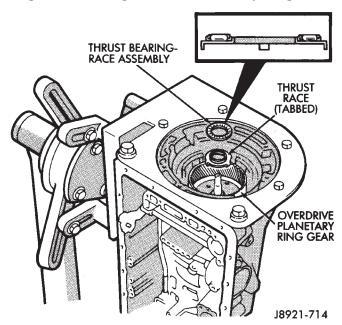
Installing Ring Gear Thrust Bearing And Race
